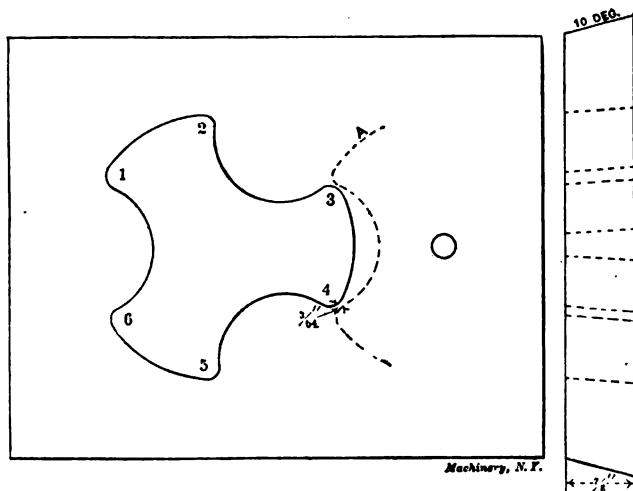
Die used as Example in Illustrating Principles of Making Blanking Dies
